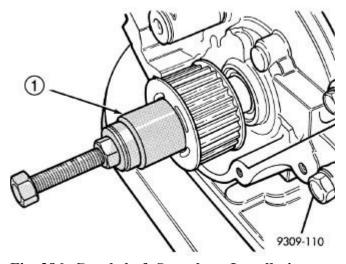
Crankshaft Sprocket - Installation Courtesy of CHRYSLER LLC
